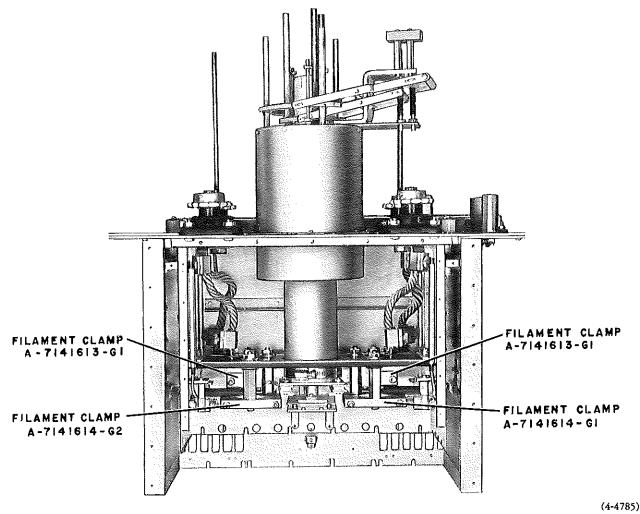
Cavity in Process of Construction: Contact Assemblies Lacking, Rear View
